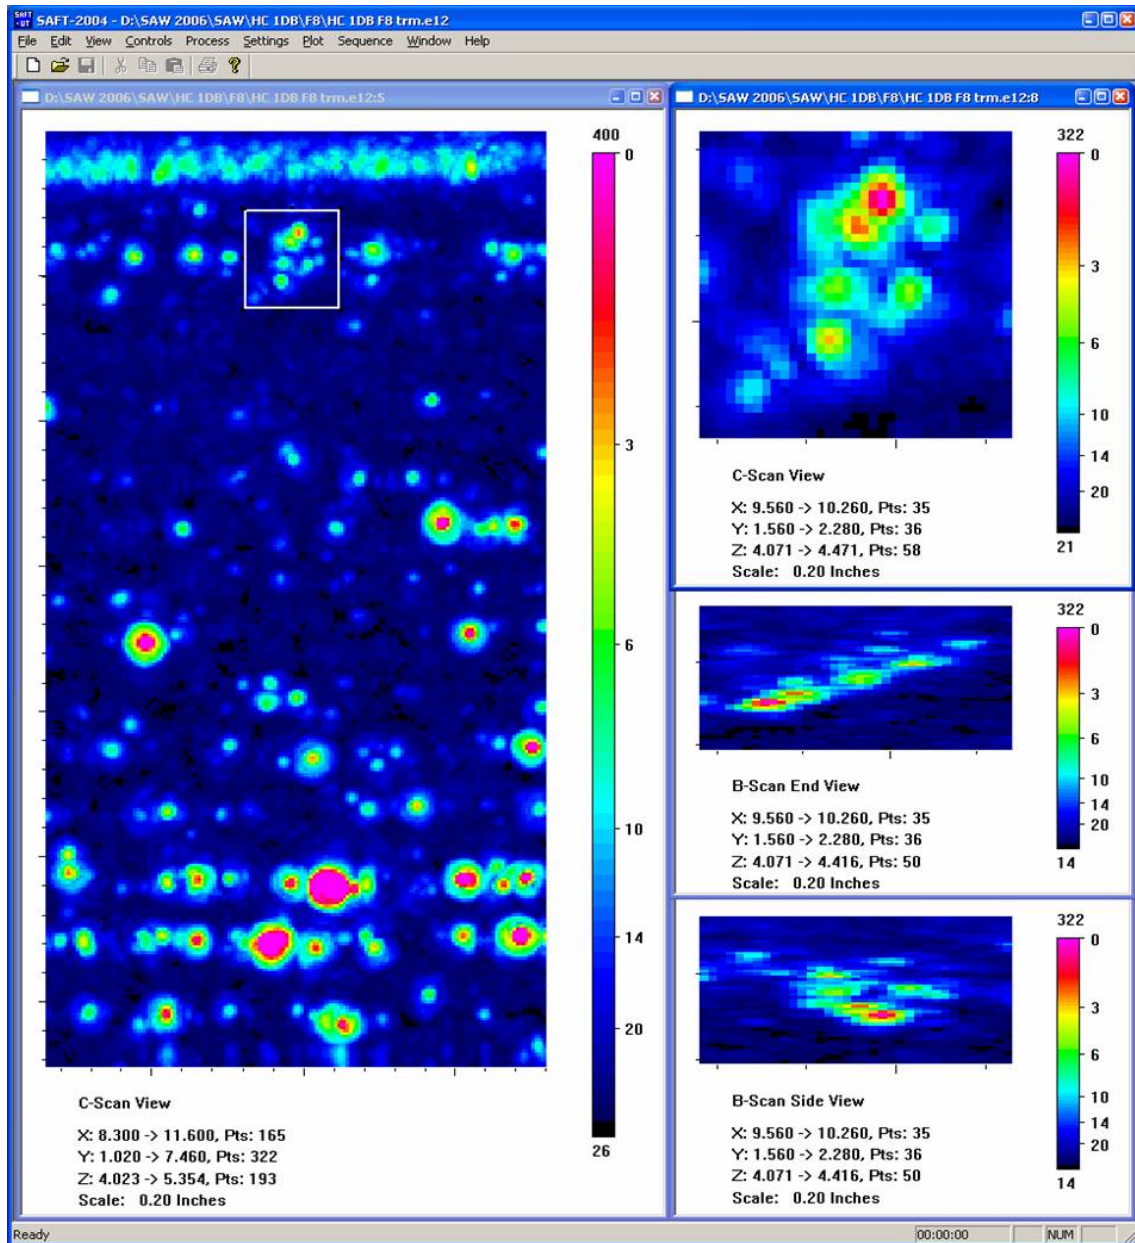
a 10 MHz F8 Immersion Testing Images of Small Fabrication Flaw: *HC3B (HC IDB-3 / IDIE 14.0 mm)*. This figure shows immersion testing data of a 14-mm flaw indication from the weld-normal testing of large weld segments. The flaw indication is identified in the box drawn in the SAFT-UT image on the left in the figure.
